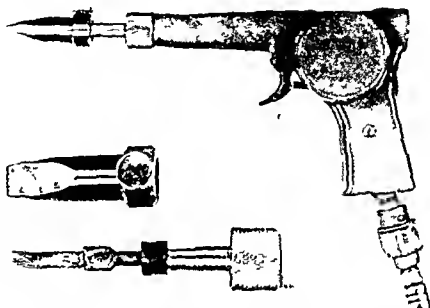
Newly developed pneumatic tattooing pistol assembly and its components.
